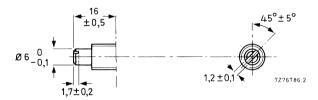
Spindle with screwdriver slot; spindle fully counter-clockwise.
